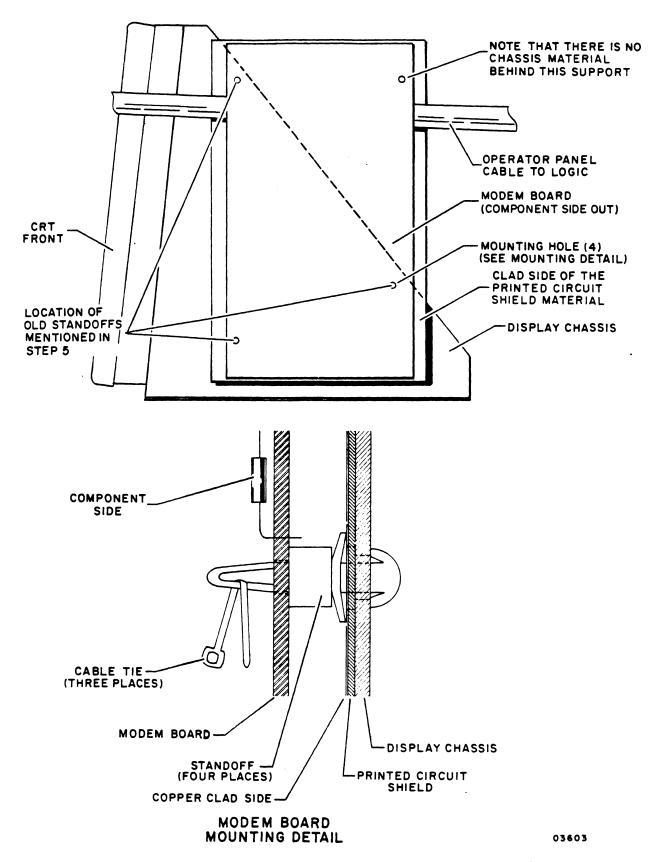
Modem Shield and Printed Circuit Board Installation
